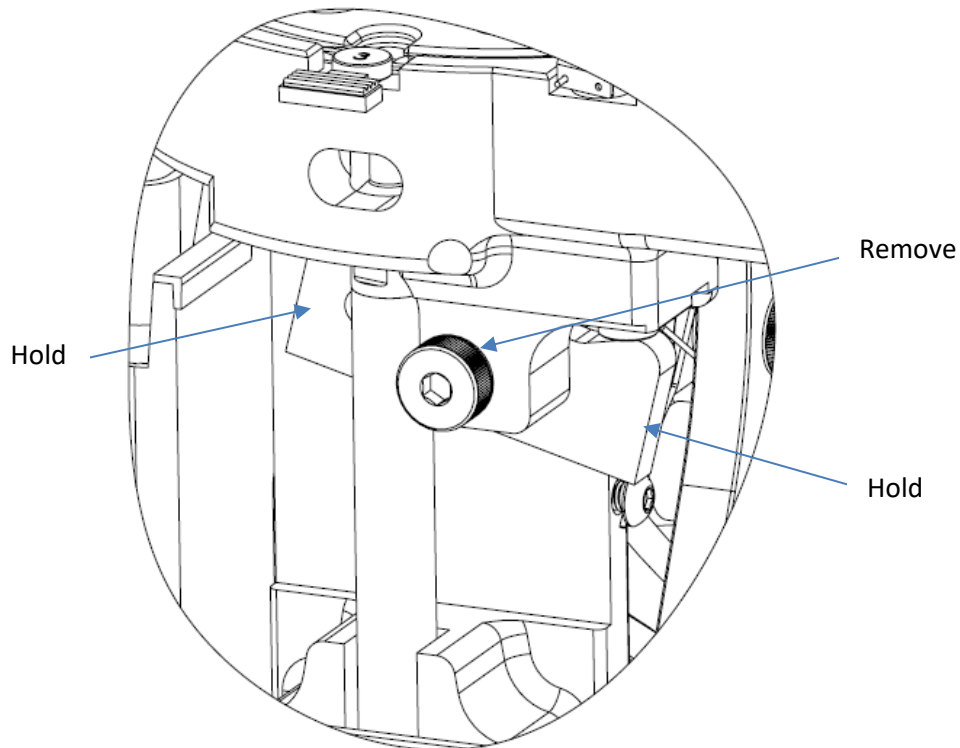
Remove the shoulder bolt to mount on station 8 adapter.
